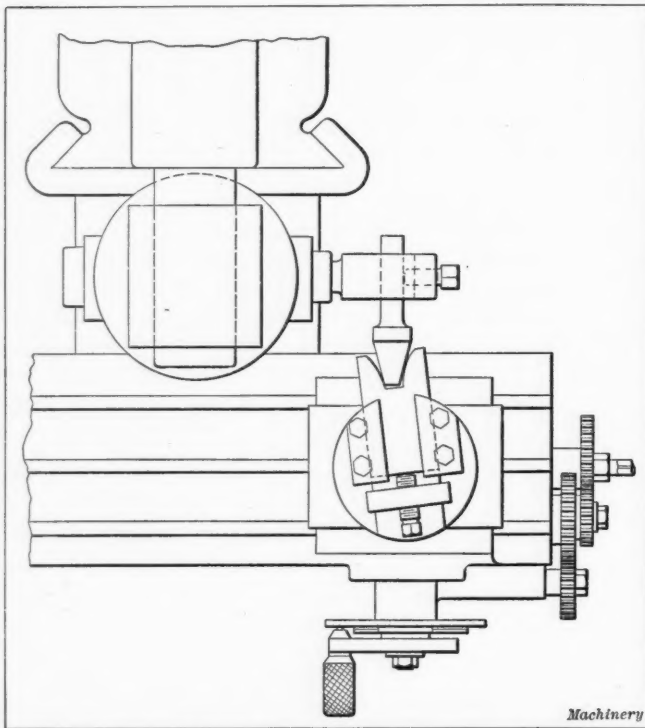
Milling Machine set up to generate Forming Tool for Gear Cutters with a Rack-shaped Tool
